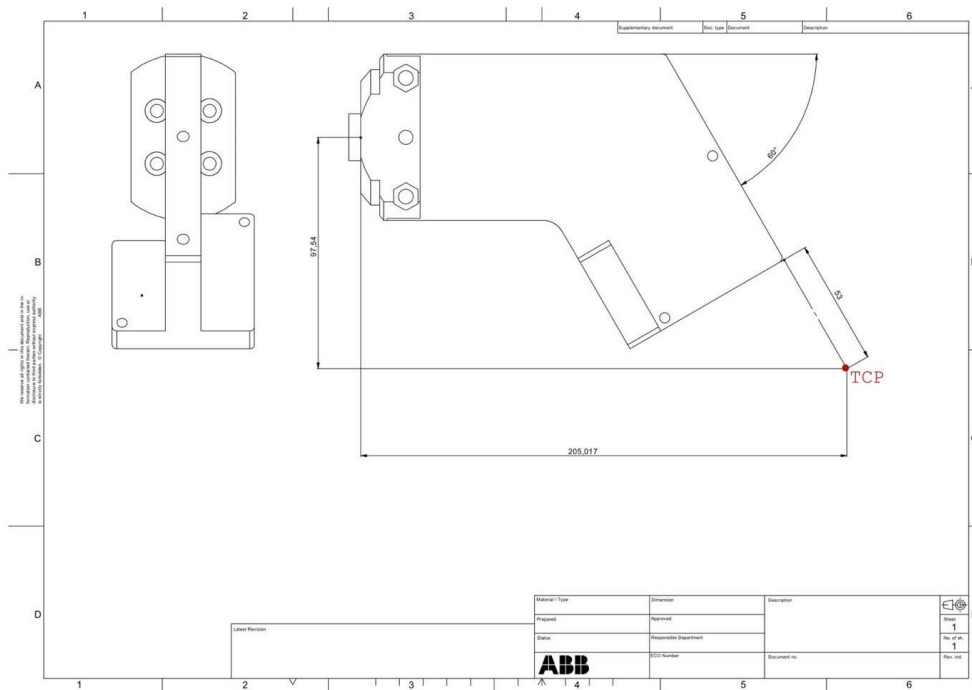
Schematic drawing of the tool, provided by ABB.
